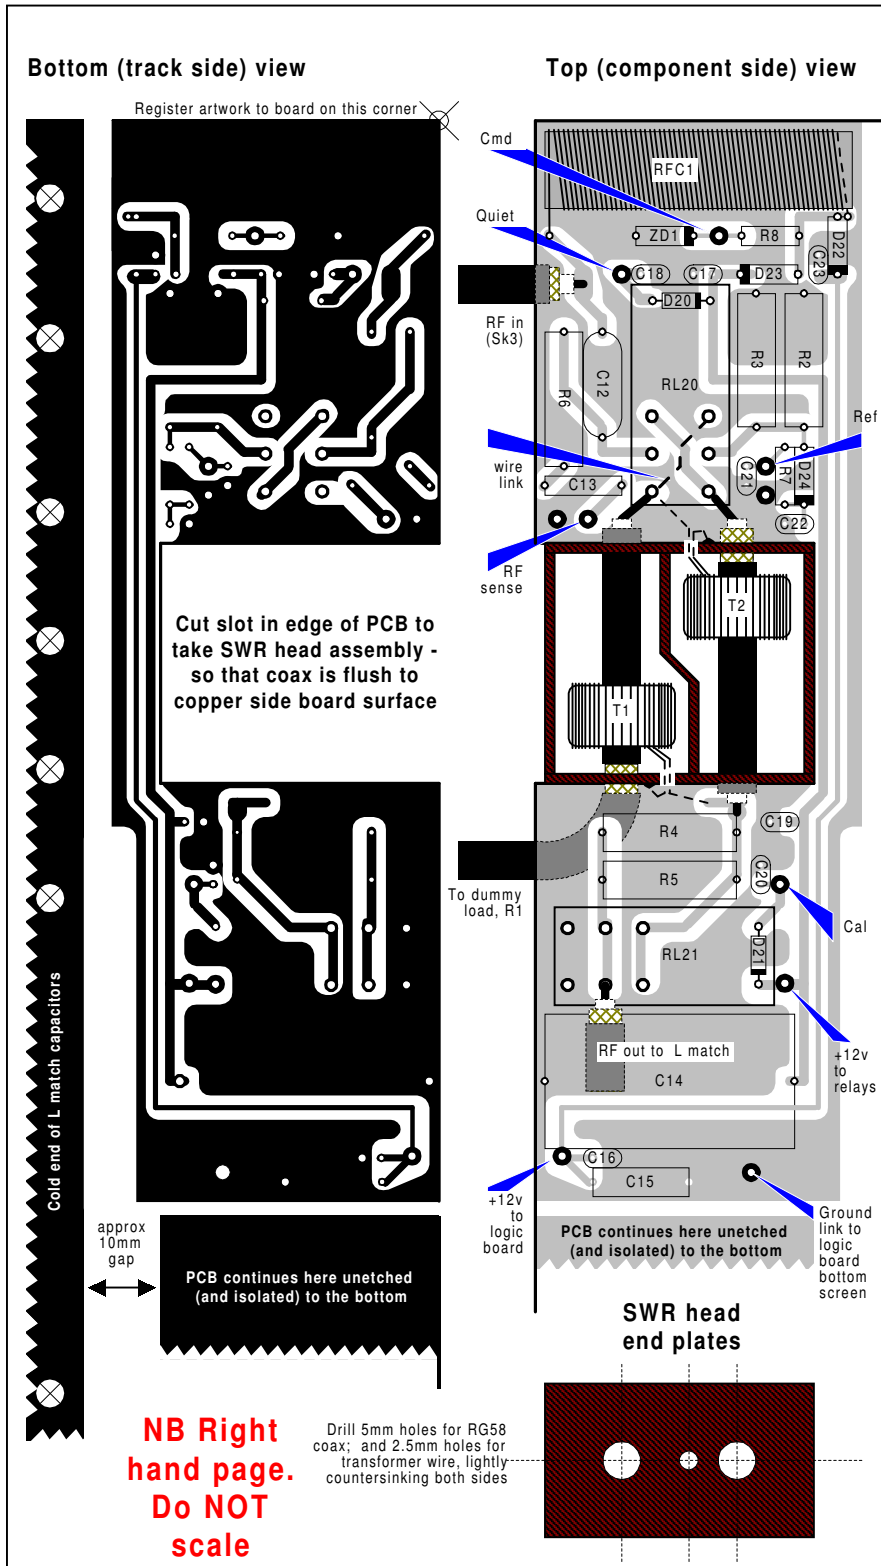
Sensor section of RF deck PCB. Note that all the coax cables are fitted on the underside (track side) of the board. Bond RFC1 to board after fitting board to casing.
